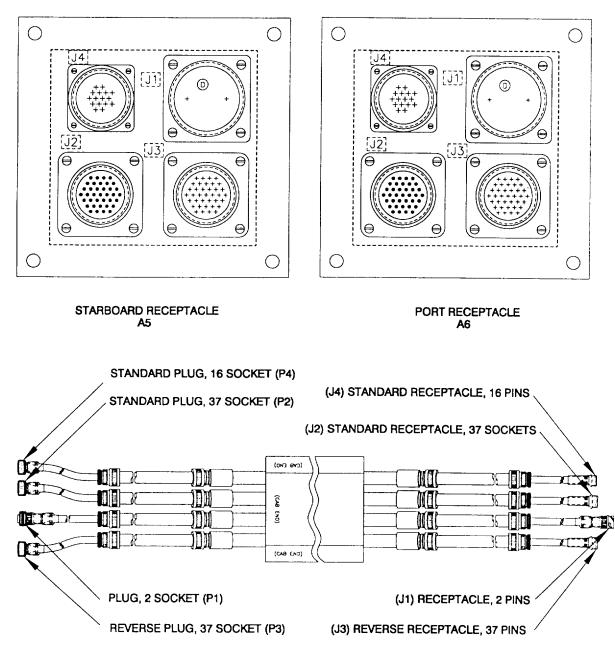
Propulsion Module/Powered Section Assembly (Interconnection Assembly - View D). (Sheet 5 of 11)
